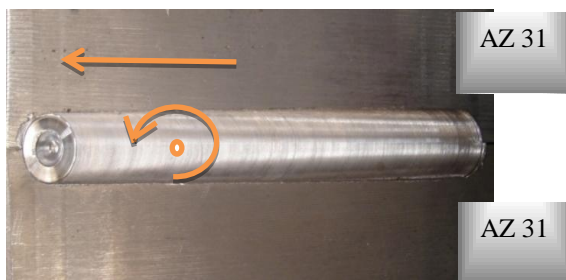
Welded joint of Mg alloy type AZ 31
